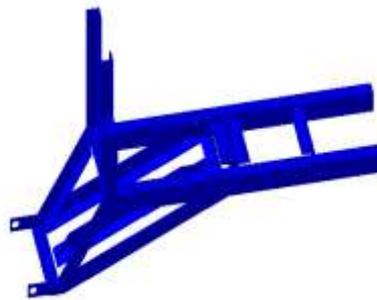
AutoCAD drawing of mainframe of BRRRI developed reaper.
